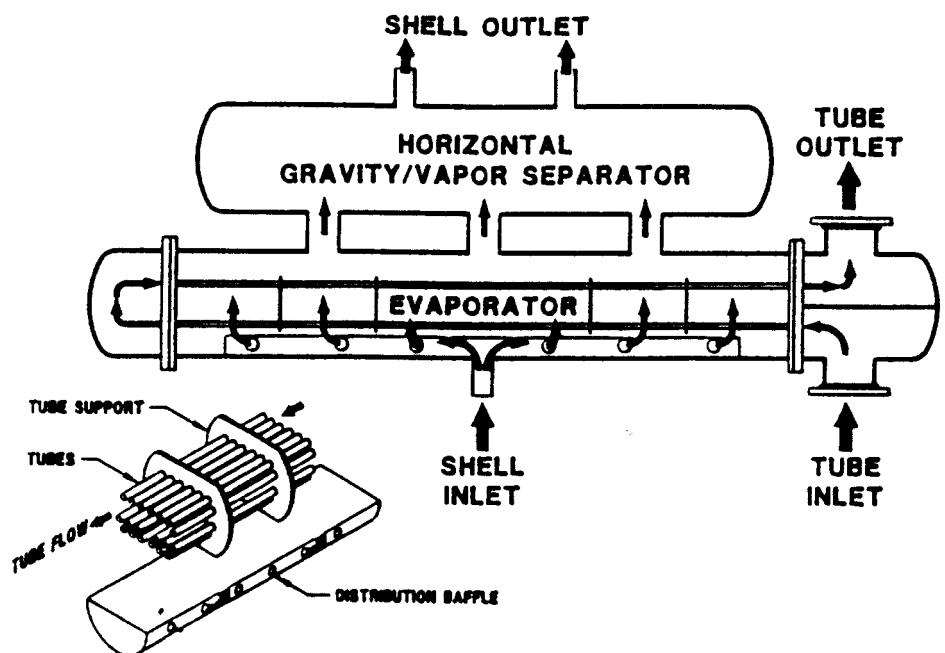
Shell-and-Tube Flooded Evaporator Full Bundle Design
